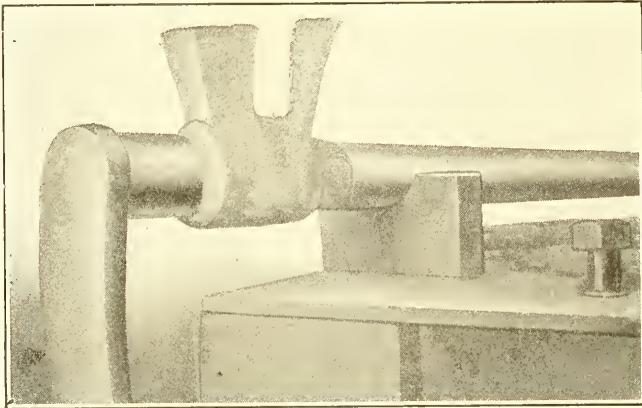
Weld on Broken Rocker Shaft Before Machining
